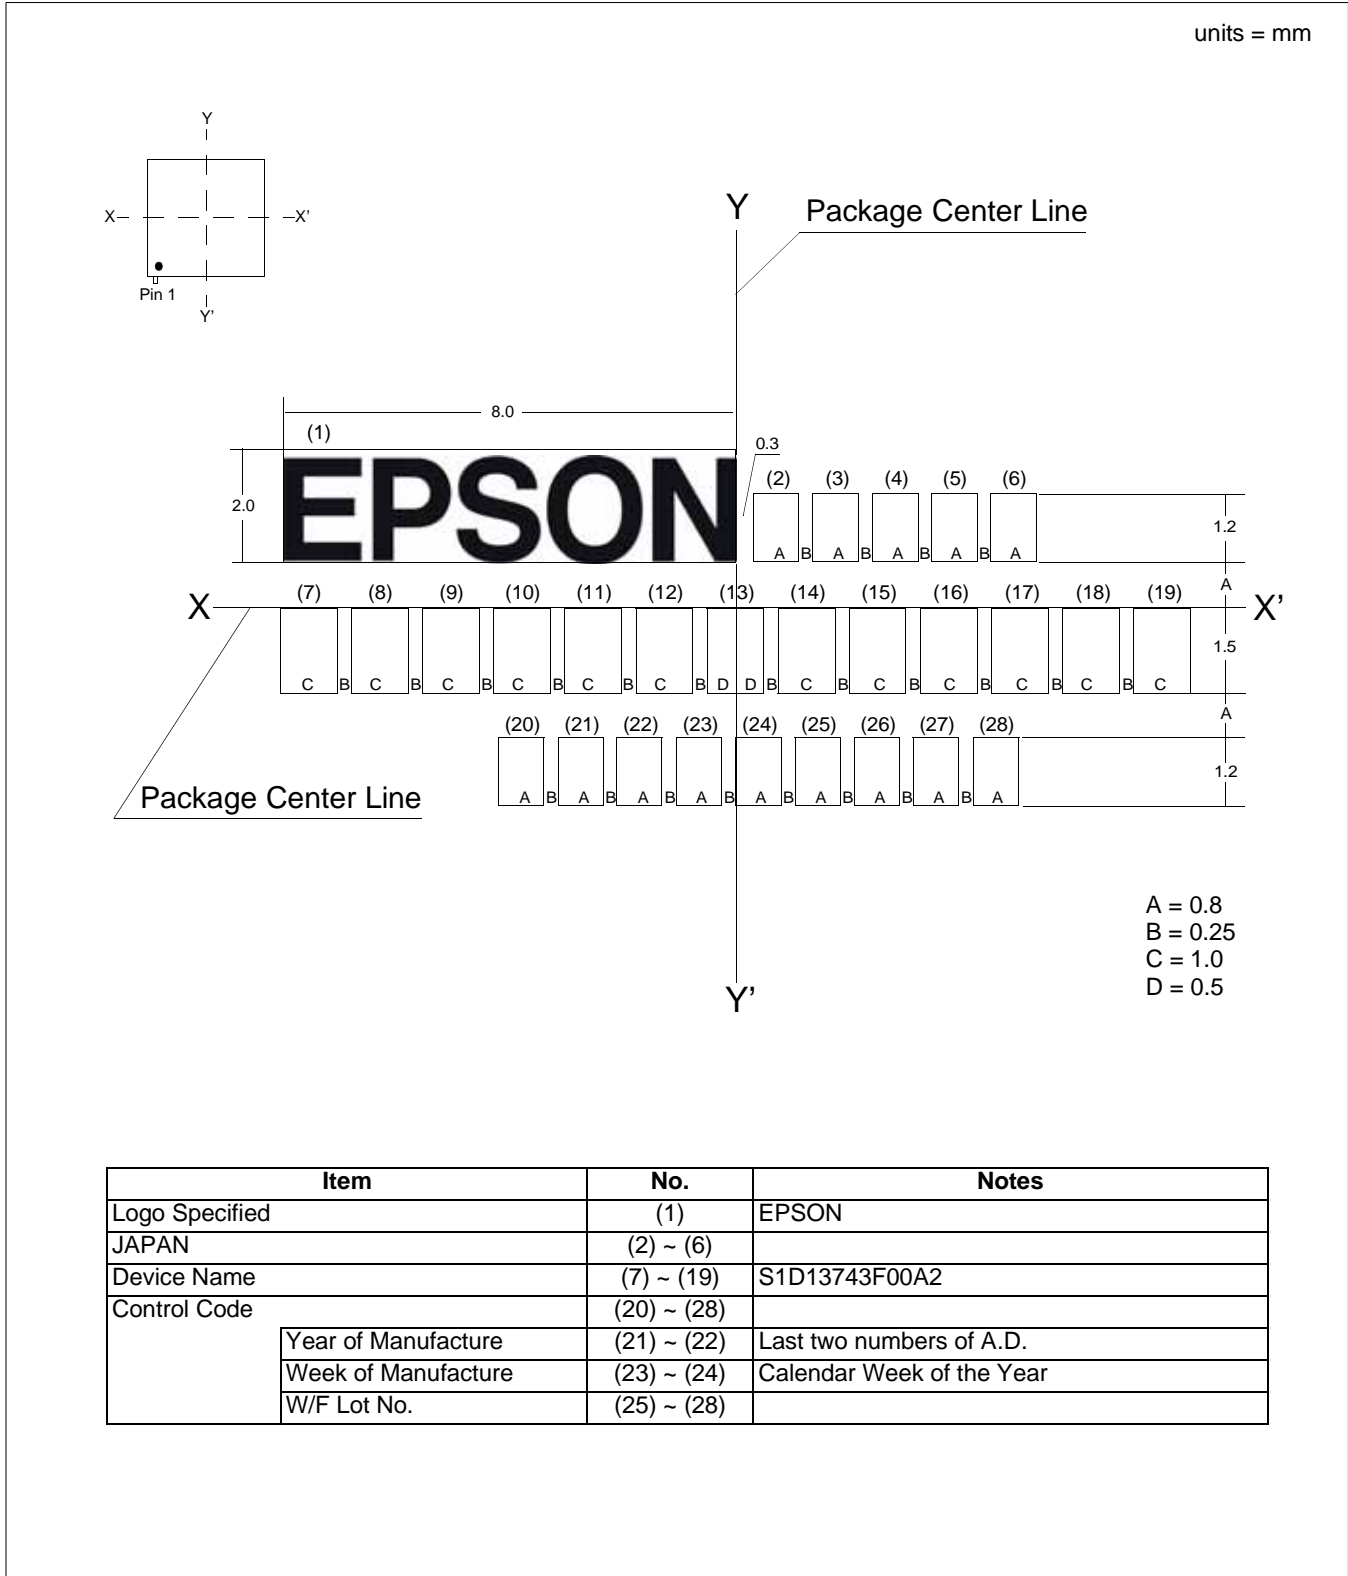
S1D13743 QFP 144-pin Package Marking
